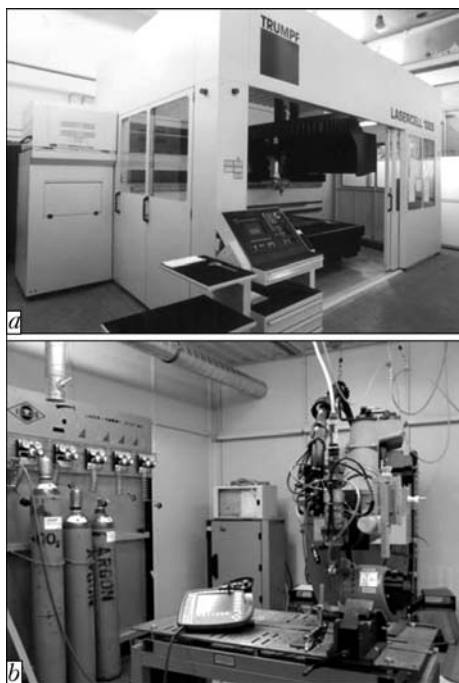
Laser stations at Instytut Spawalnictwa: *a* — laser cell TLC 1005 with CO₂ laser TLF 3800; *b* — YAG laser HL 2006D/LCU with KUKA robot KR30/2 HA and welding head D70
